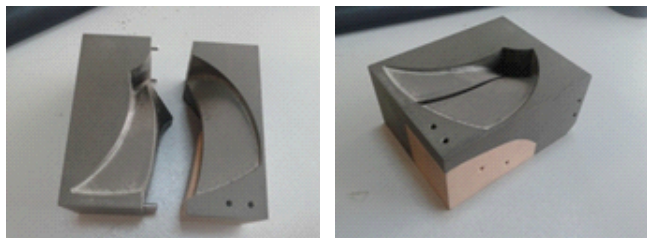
Final Necuron 1:2.5 scale mold for one impeller, started from CAD model (fig. 3)
